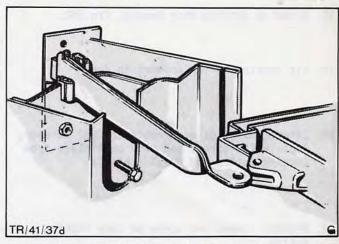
Remove pin and retaining ring connecting check strap mounting on A pillar.
